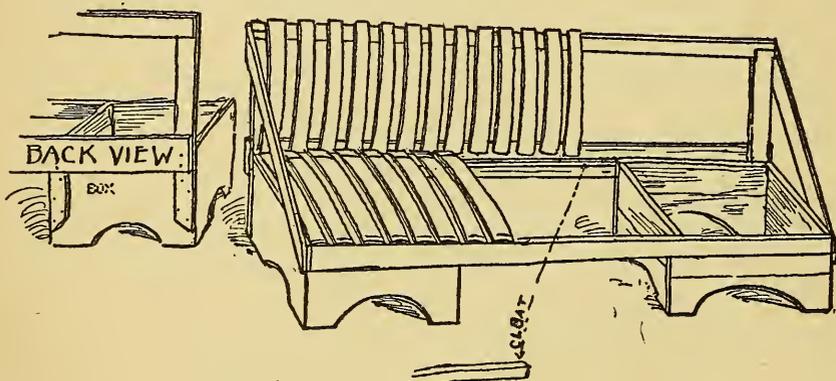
How to Make a Sofa with Stave Spring Back and Seat
